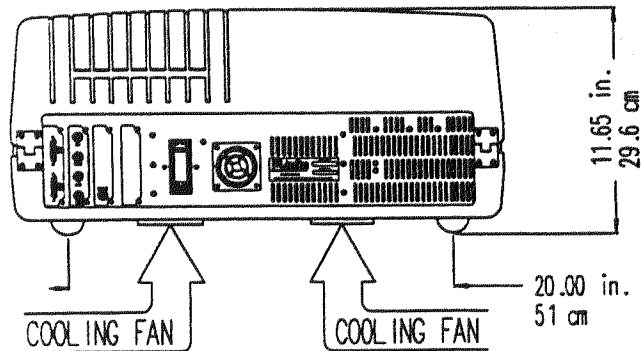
AMPRO 3300 CASE DIMENSIONS
